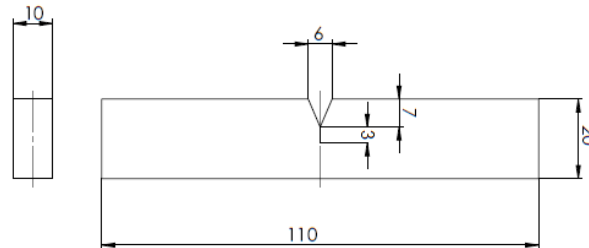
The dimensions of the test specimen, including the fatigue crack.
